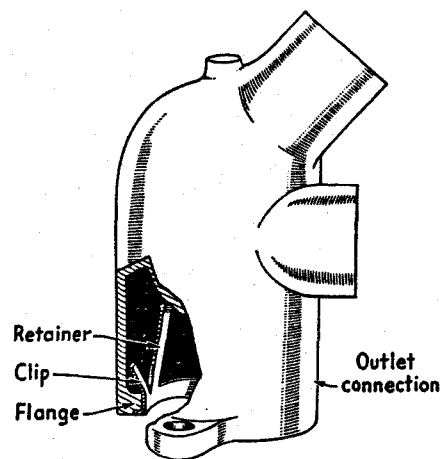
The clips on the thermostat retainer in the LaSalle cylinder head water outlet should be crimped over the outlet connection flange to keep the retainer in position
